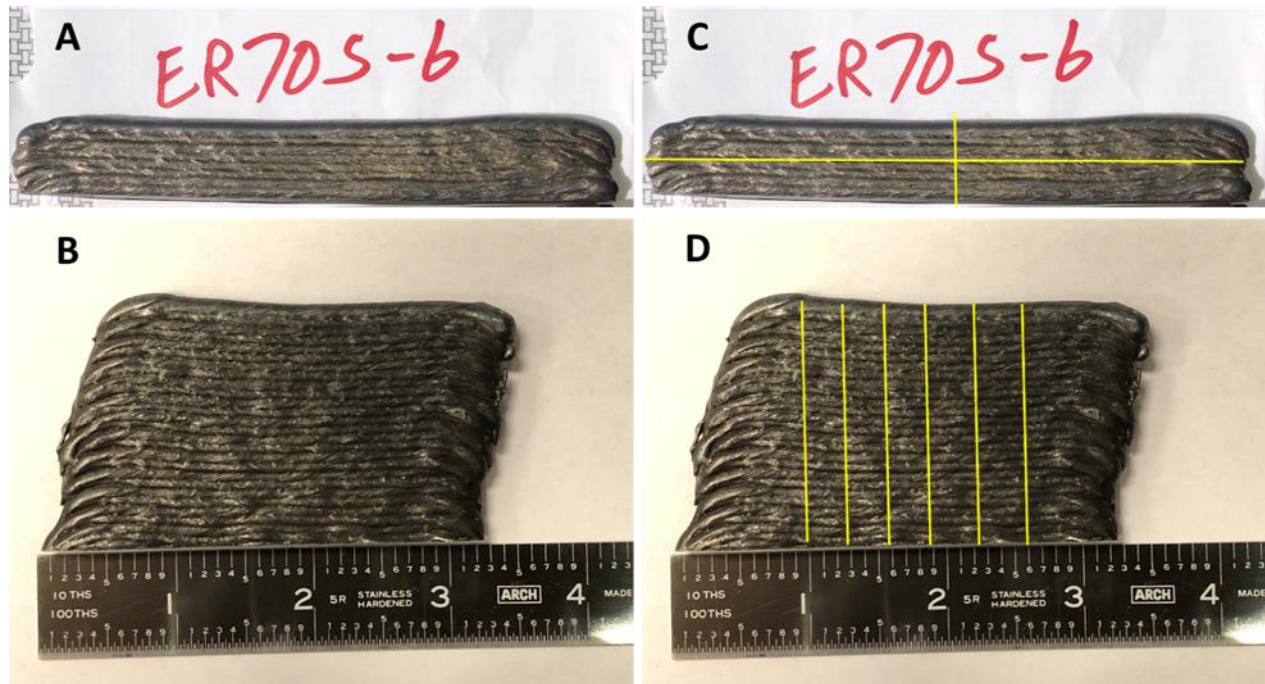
Metal pieces printed from ER70s-6 welding wire 0.6mm feedstock. The first printed sample (a) was welding onto the steel build plate with each layer stacked vertically on top of subsequent layer, totaling 8 layers. The second sample (b) was made in the same manner with over 20 layers stacked. The samples were cut along the yellow lines (c,d) by an EDM machine to then be tested in the Instron 3-point bend test.
